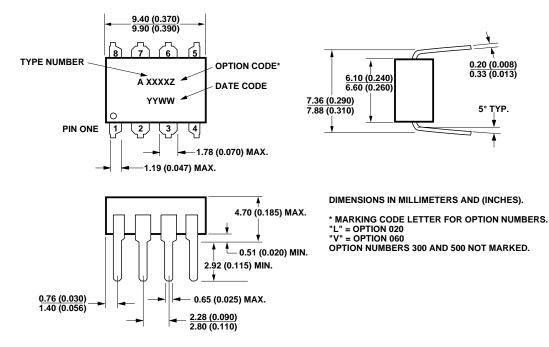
8-Pin Dual In-Line Package Device Outline Drawing.
